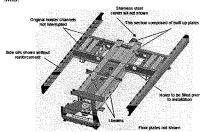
Crush-zone Draft Sill Integration with M1 Car Body Bolster and Center Sill
